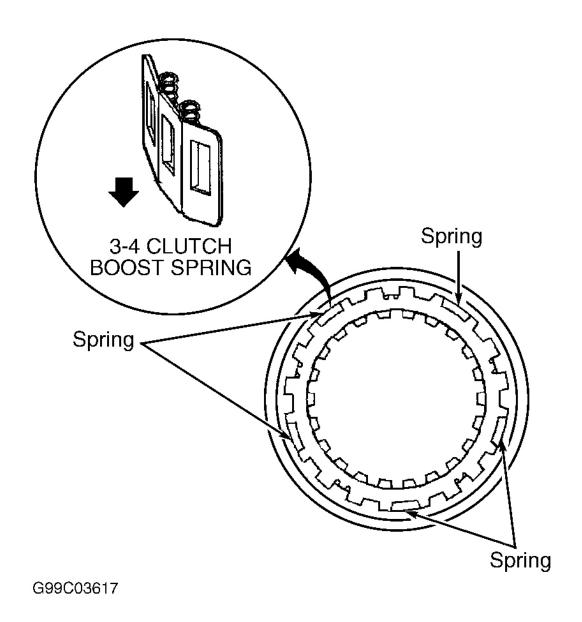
Locating 3-4 Clutch Booster Springs Courtesy of GENERAL MOTORS CORP.
